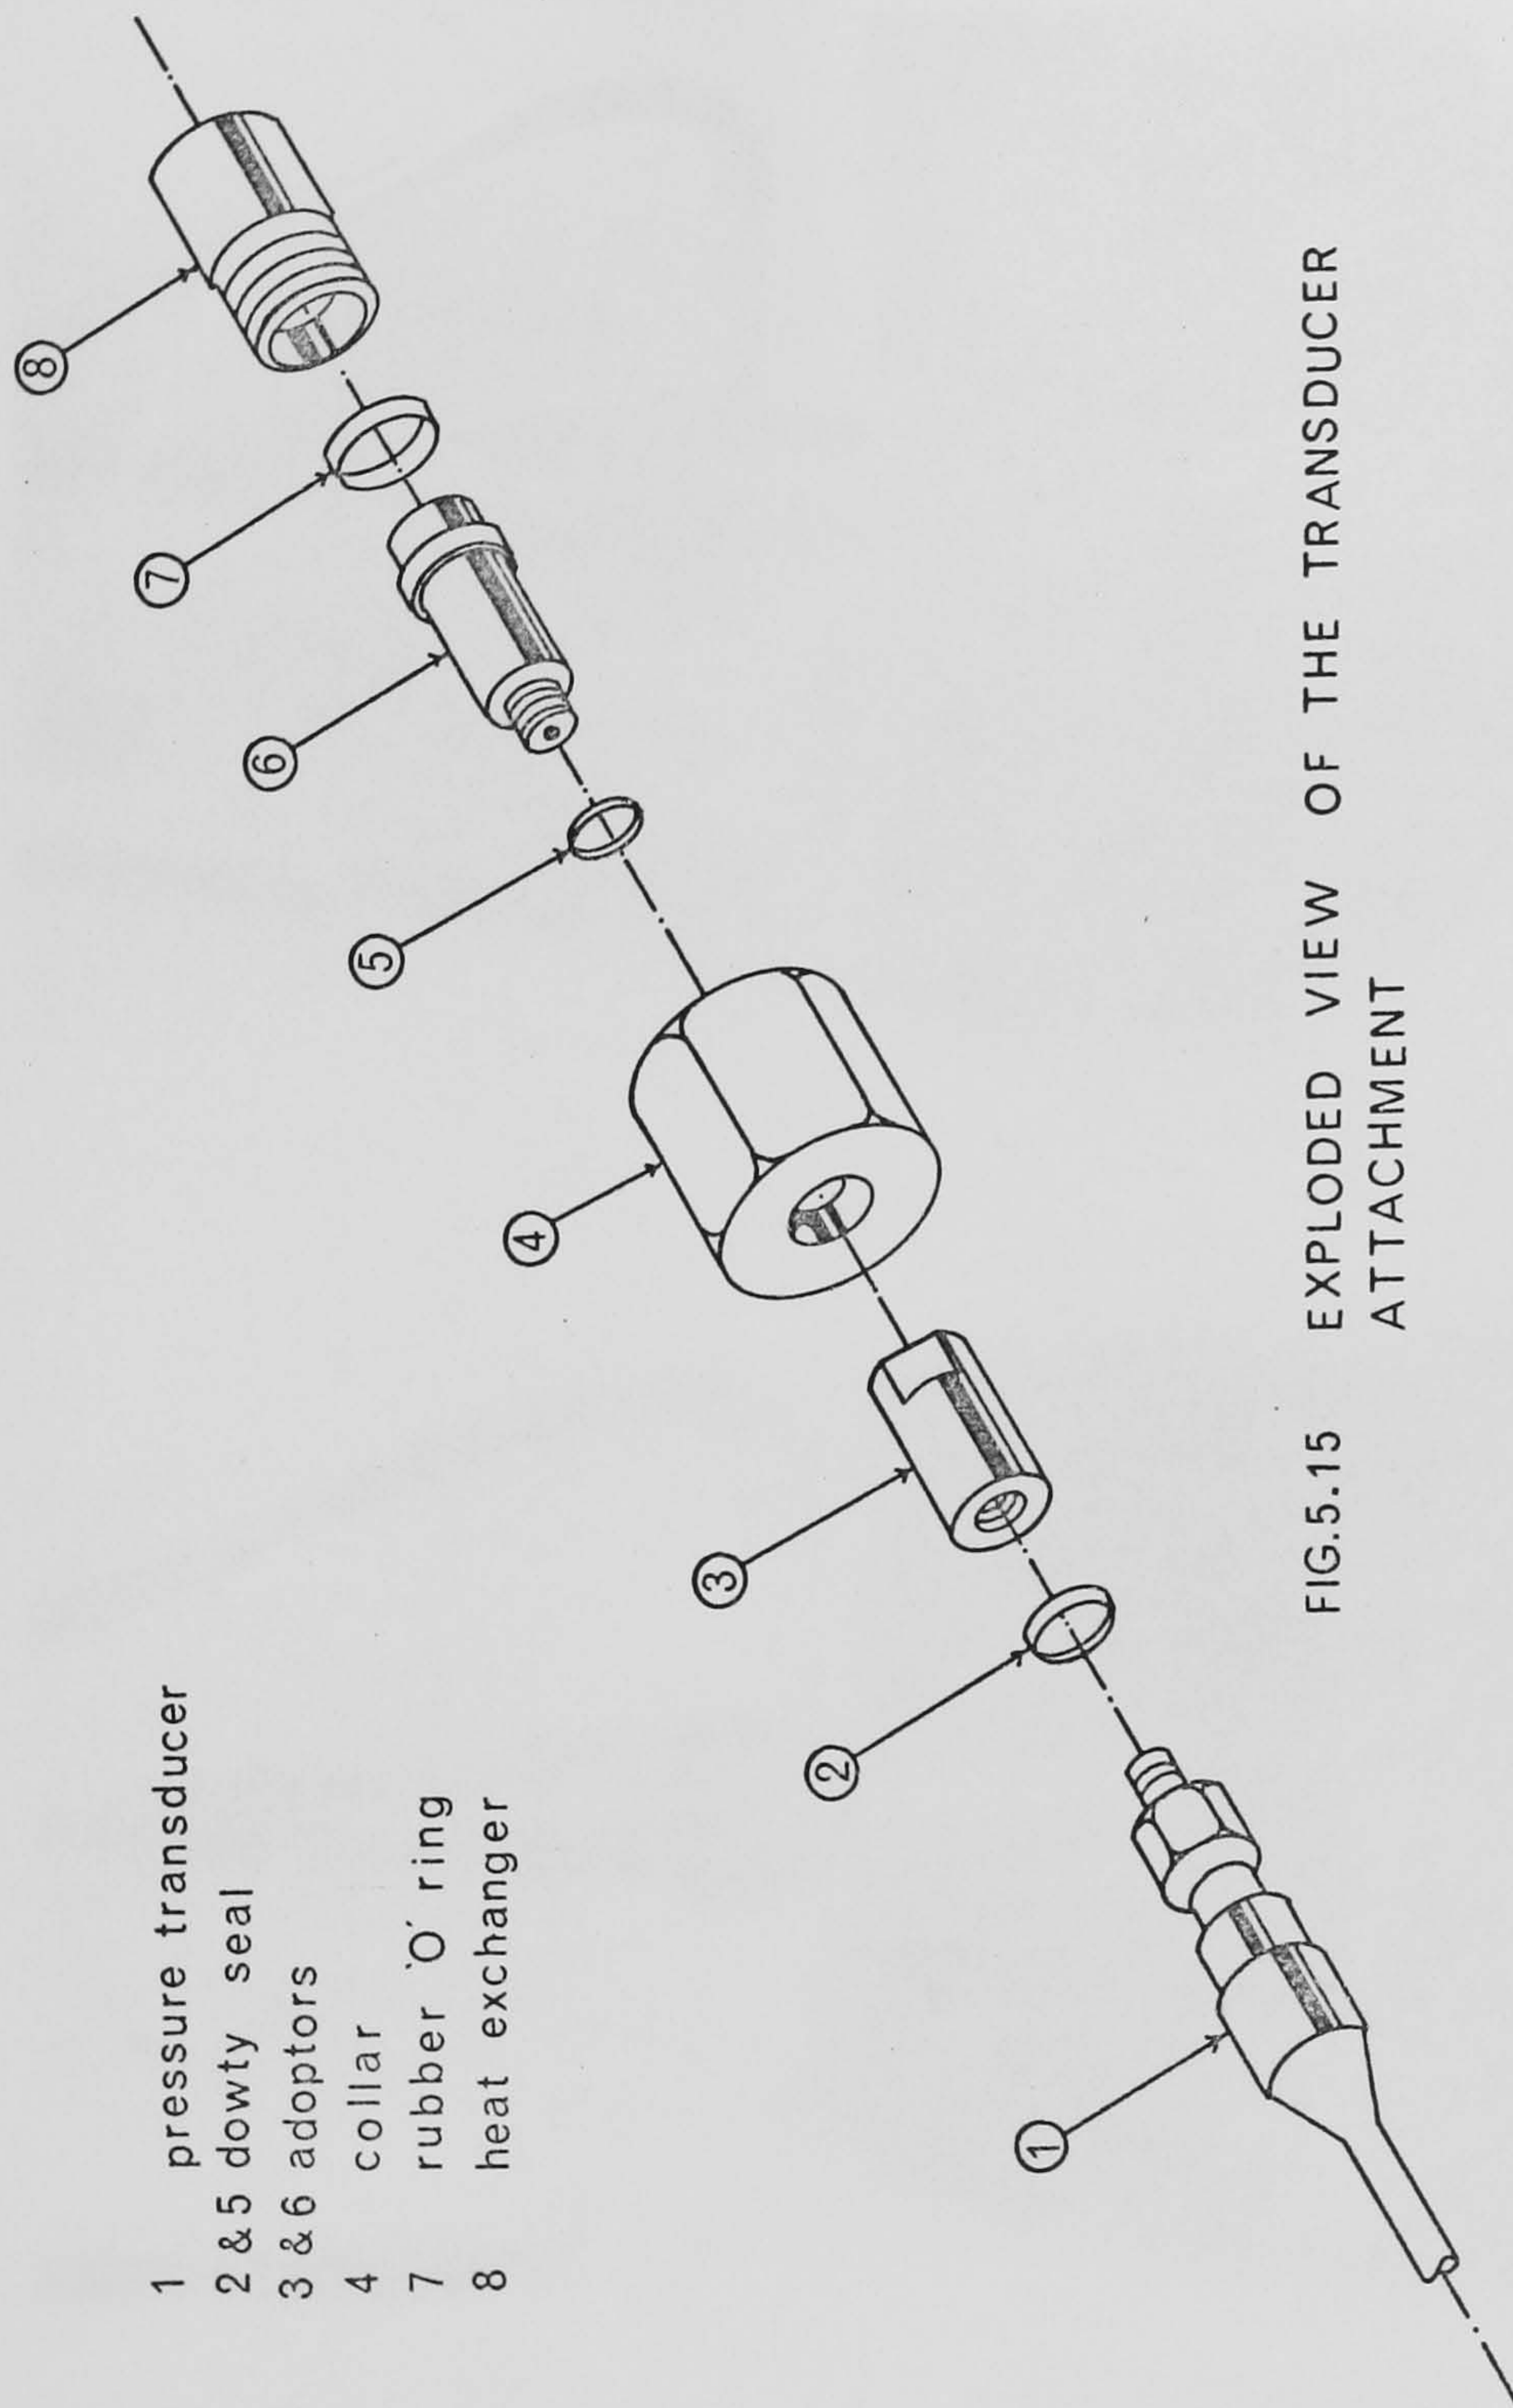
EXPLODED VIEW OF THE TRANSDUCER ATTACHMENT
